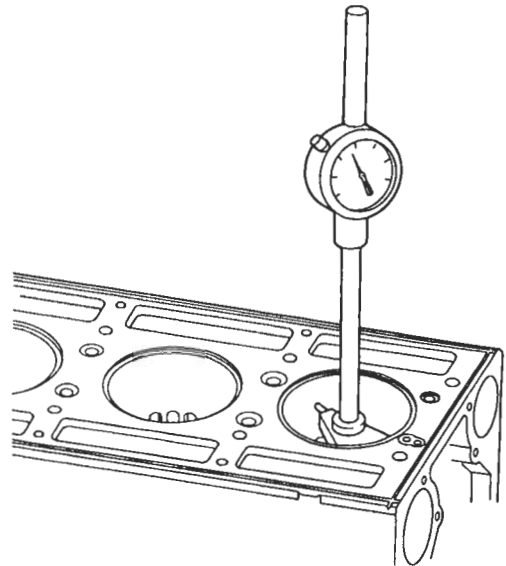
Checking Bore of Cylinder Block with Tool J 5347-B
